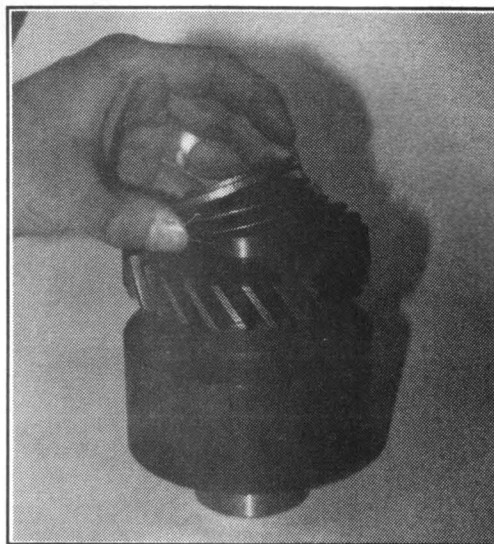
Remove the thrust bearing set. Notice the thick race is next to the gear housing.
